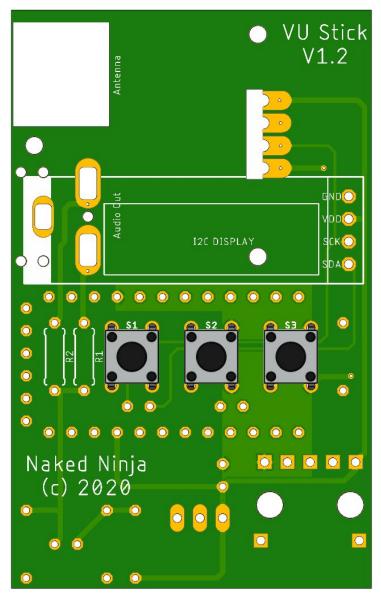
Front view of the VU Stick V1.2 PCB with tactile buttons placed and soldered.
